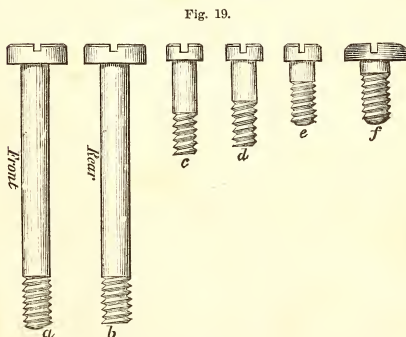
Lock and side-screws, full size. *a*, *b*, side-screws; *c*, sear-screw; *d*, bridle-screw; *e*, sear-spring screw; *f*, tumbler-screw.
